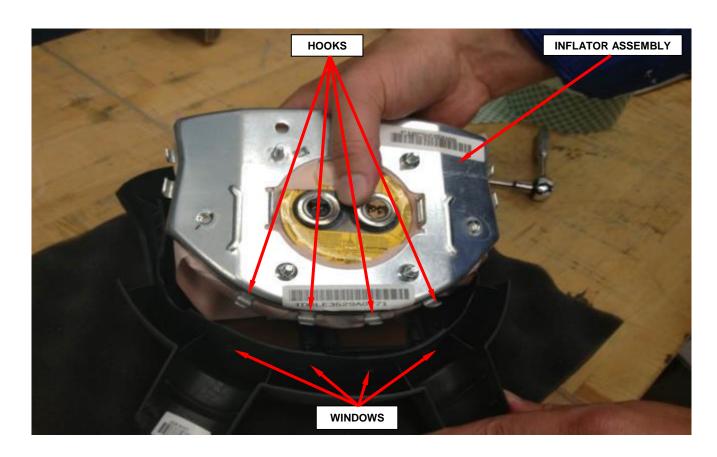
Inflator Assembly to Driver Airbag Cover Hooks
